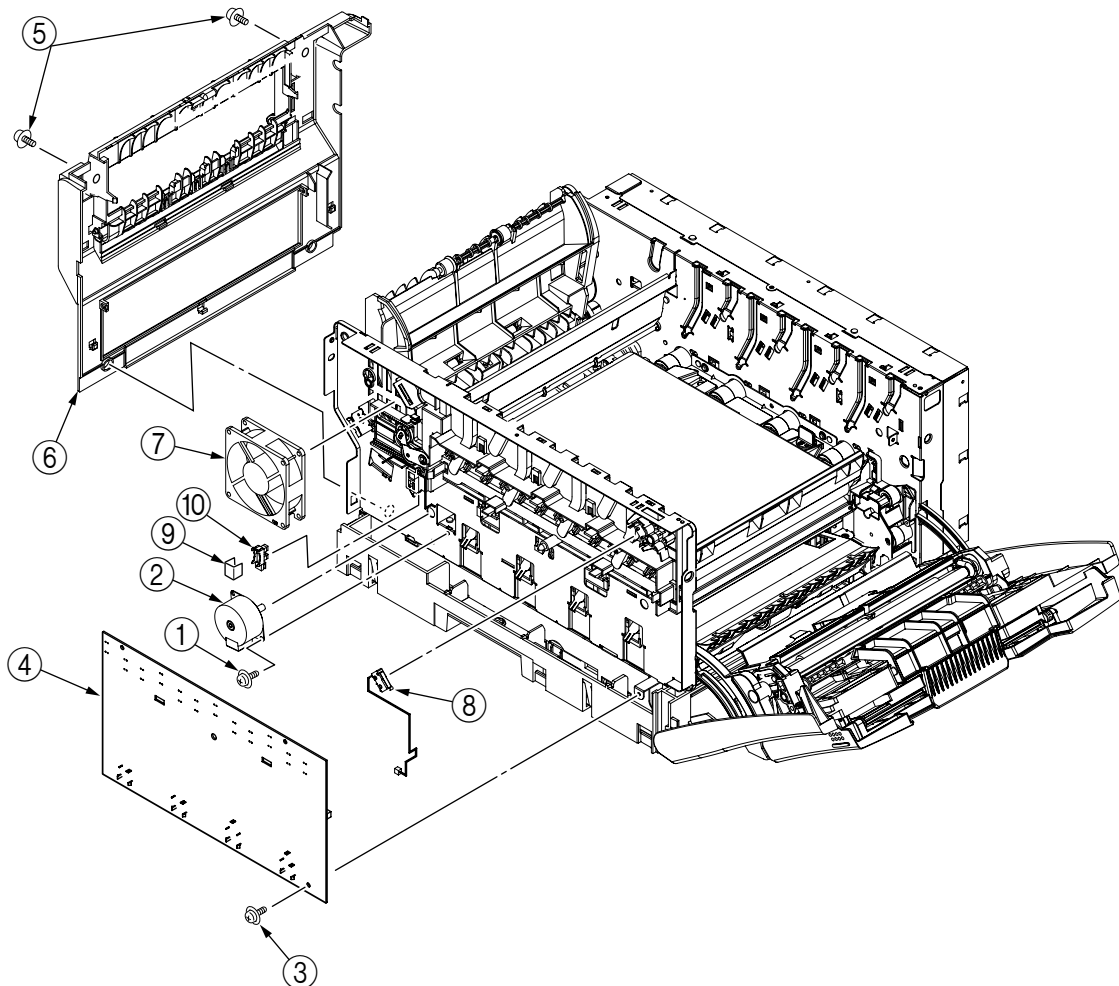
FAN (Fuser) / Belt Motor / High Voltage Power Supply Board / Cover Open Switch / Image Drum Up/Down Sensor
